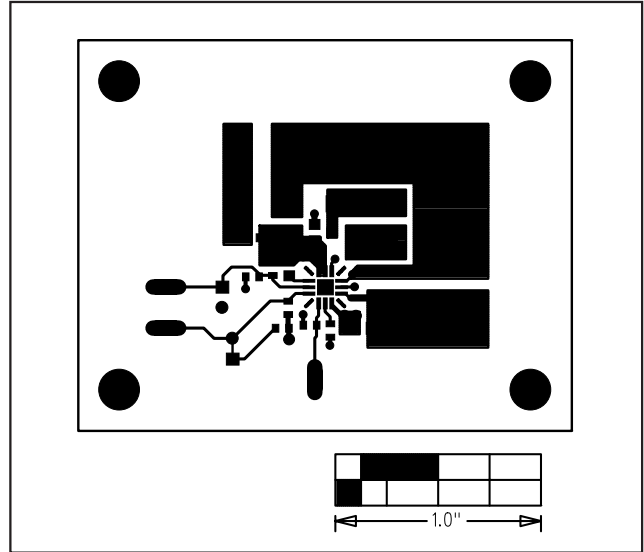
MAX1926 EV Kit PC Board Layout—Component Side
